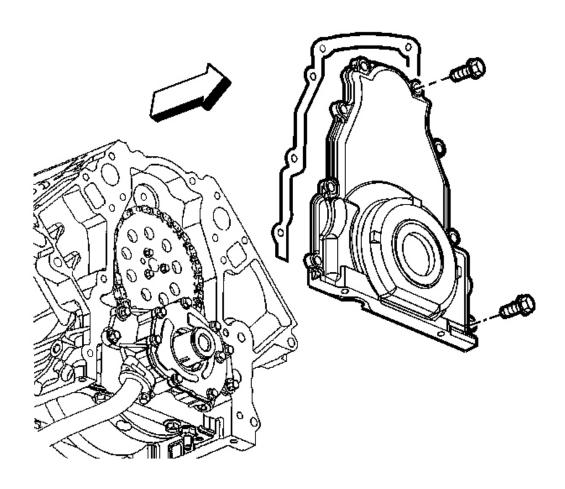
View Of Front Cover & Gasket Courtesy of GENERAL MOTORS CORP.
